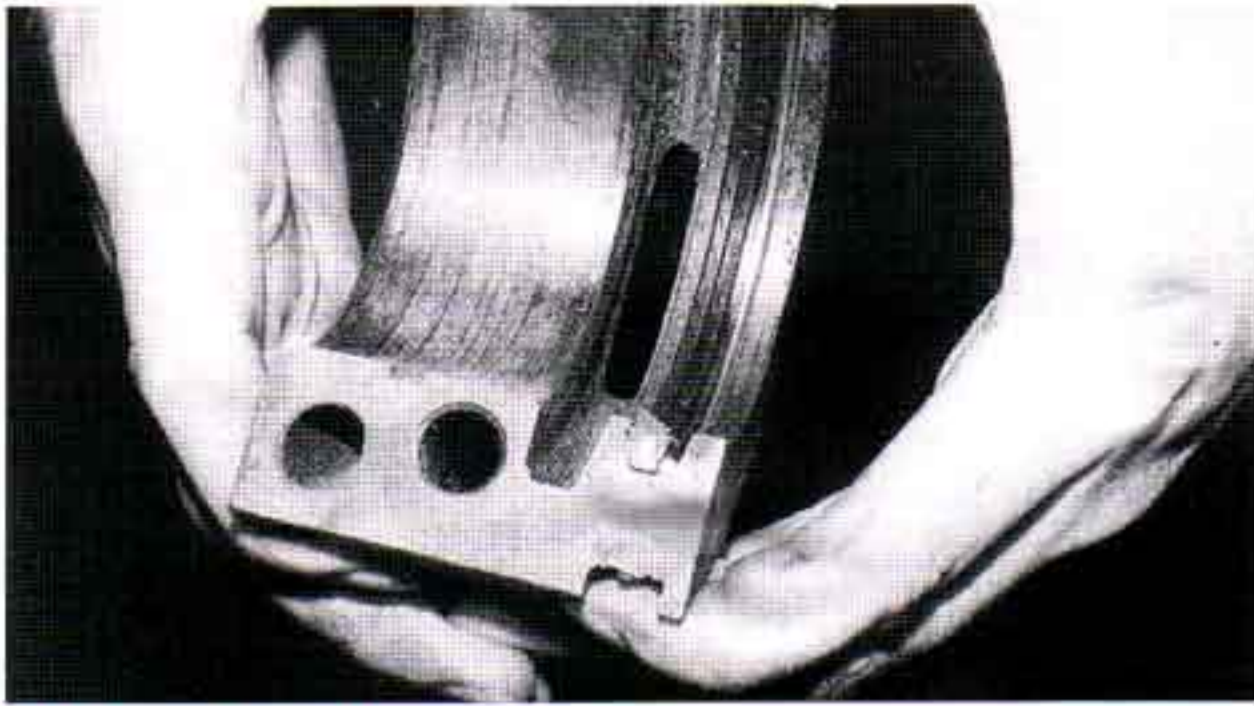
& 5b: On V8 installations, there is a wire spacer that fits in the rear of the seal groove to keep the seal true in the engine block and main cap. Install the wire spacer to the rear of the new seal. 6-cylinder installations do not required installtion of this spacer.
